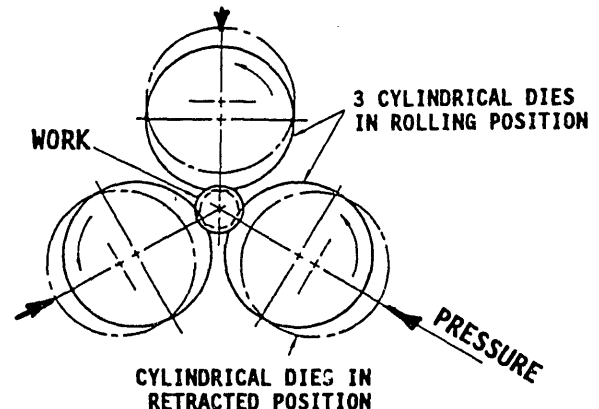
Cylindrical Die-Work Piece Configuration for 3 Die Action in In-Feed Rolling Process, Courtesy of Reed Die Co.
